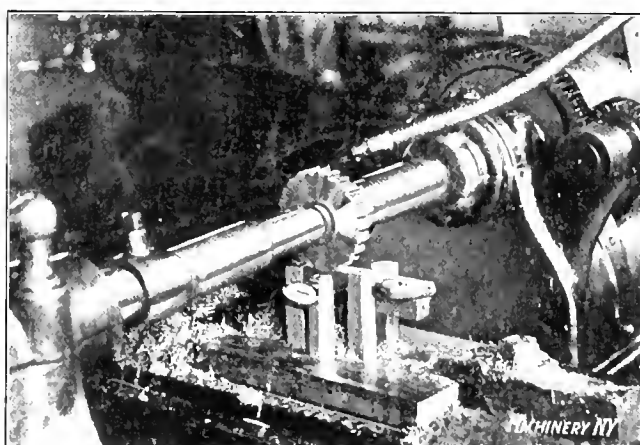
Milling the Slots for the Blades in Cutting-off Tools
